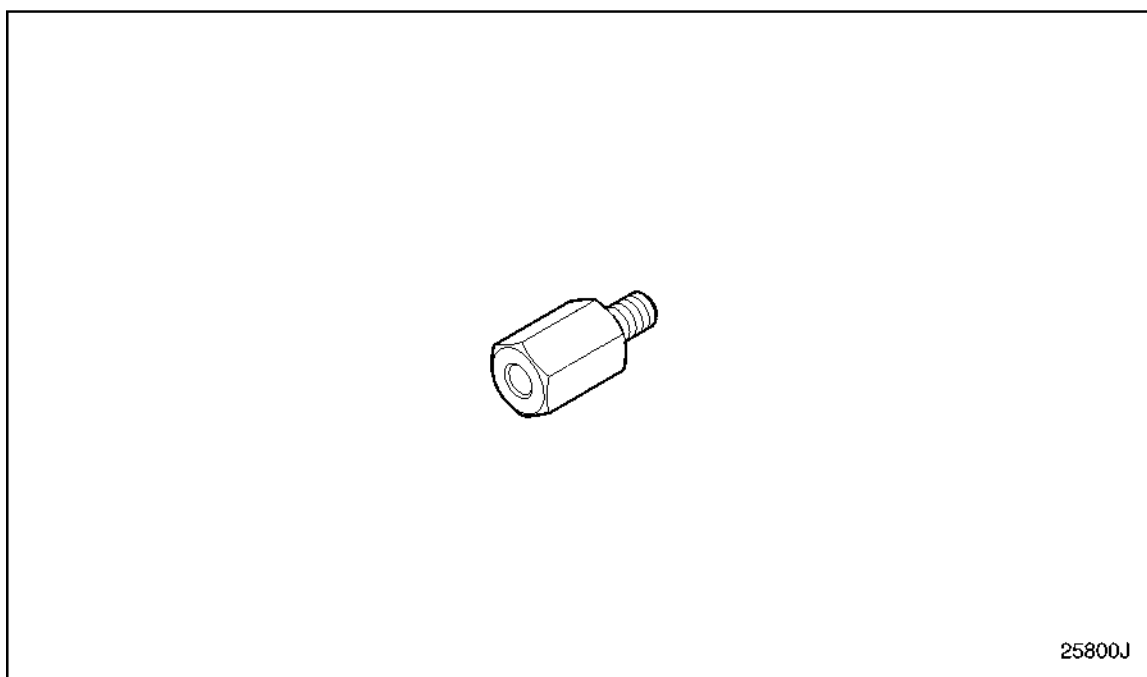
Flywheel Runout Gauge Adapter,J 9737-11
